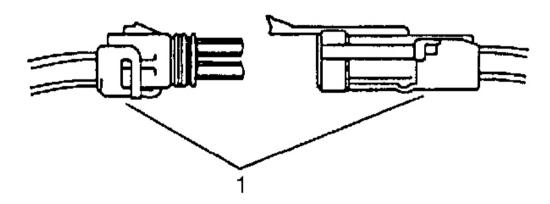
Separating Weather Pack Connector Halves Courtesy of GENERAL MOTORS CORP.
